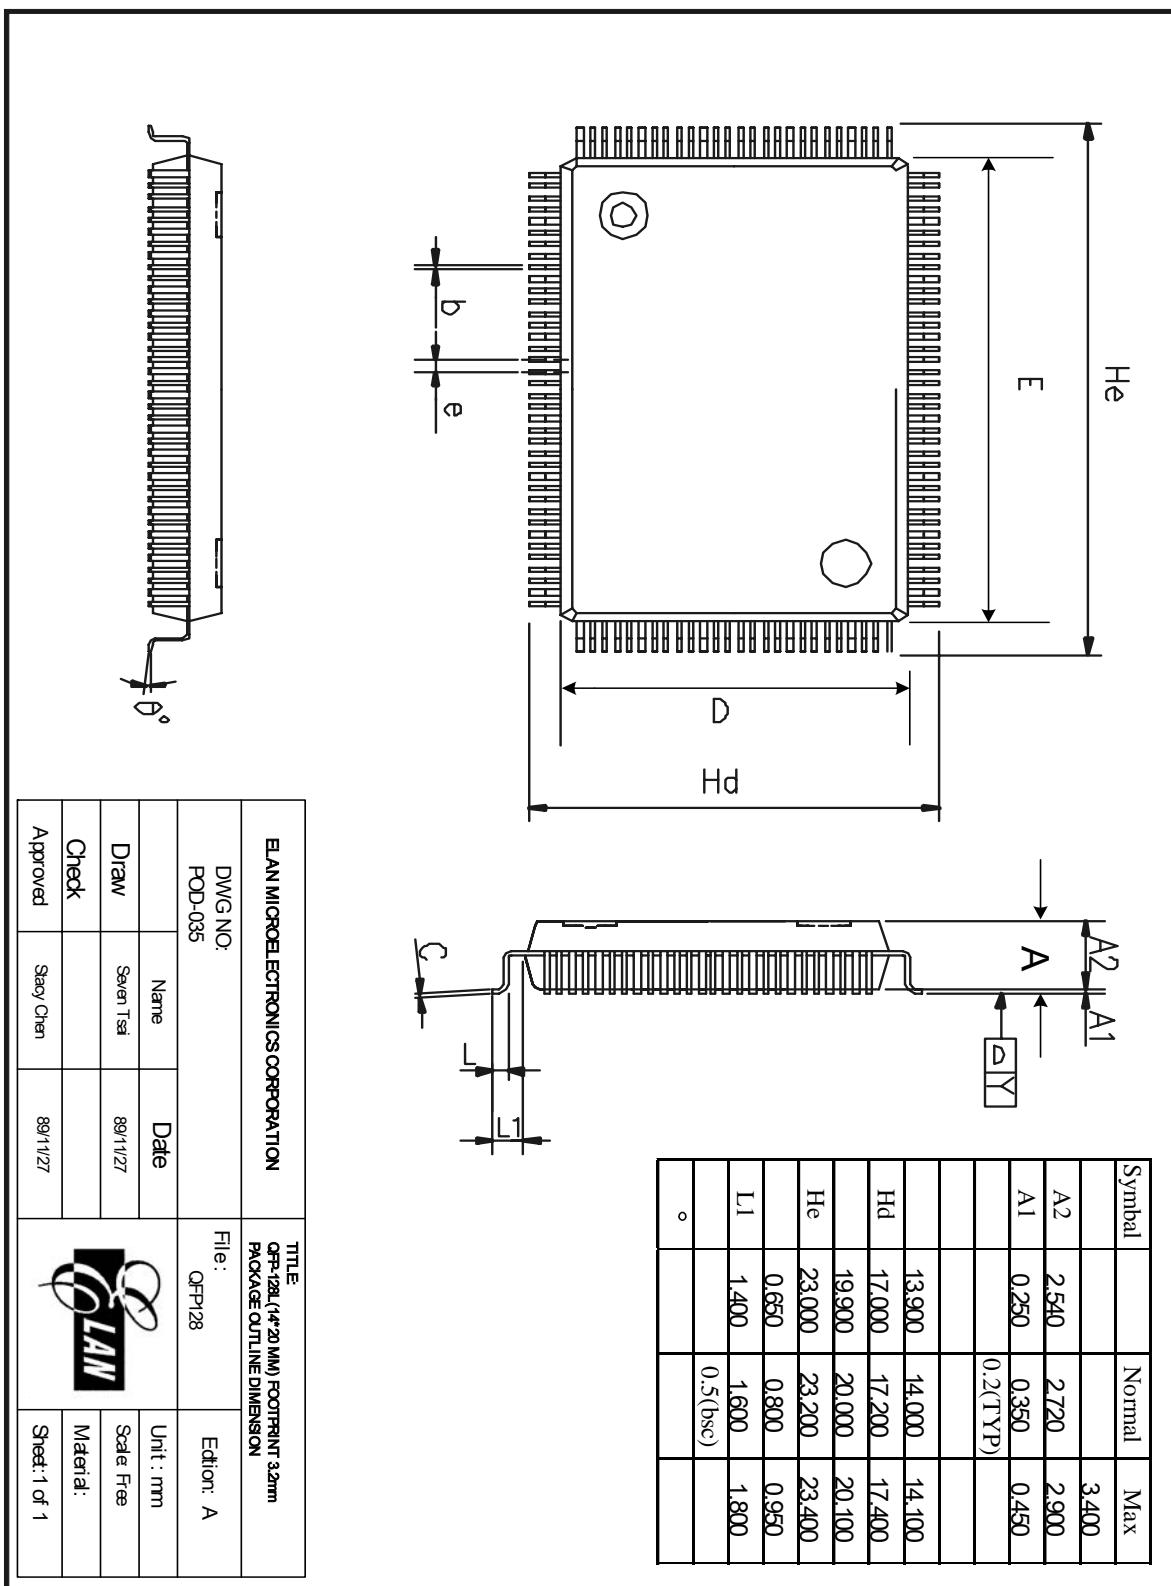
ePG3231 Package QFP 128 pin Outline Dimension
